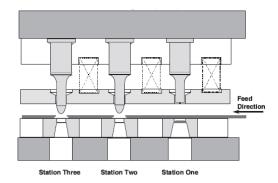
Location the part material in the stamping tool using Piloting. (*Dayton Progress Corporating*, 2003)
